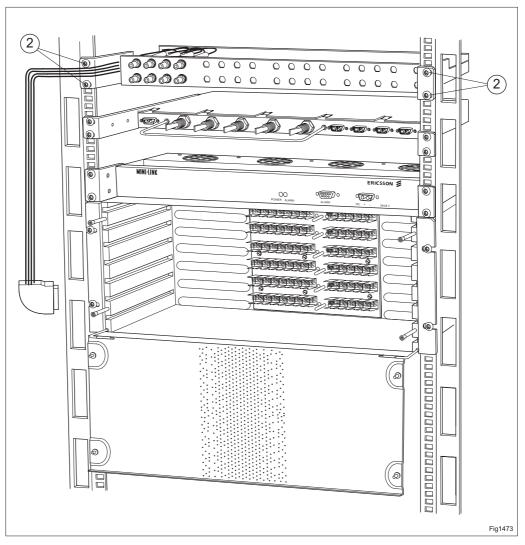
Fitting the coax cable panel in a 19" rack, using captive nuts.
